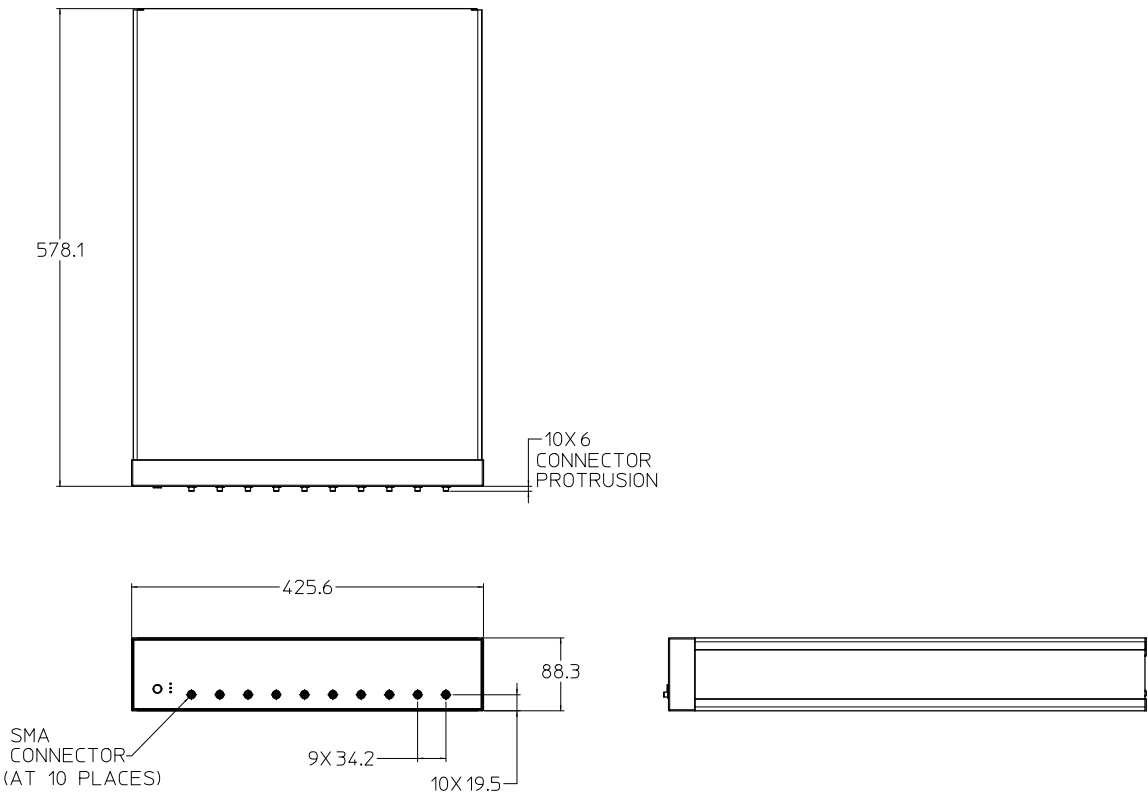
Mechanical dimensions of the J7205A/B with SMA connector
